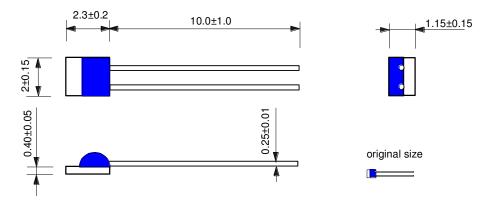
Mechanical dimensions of Platinum Temperature Sensor
